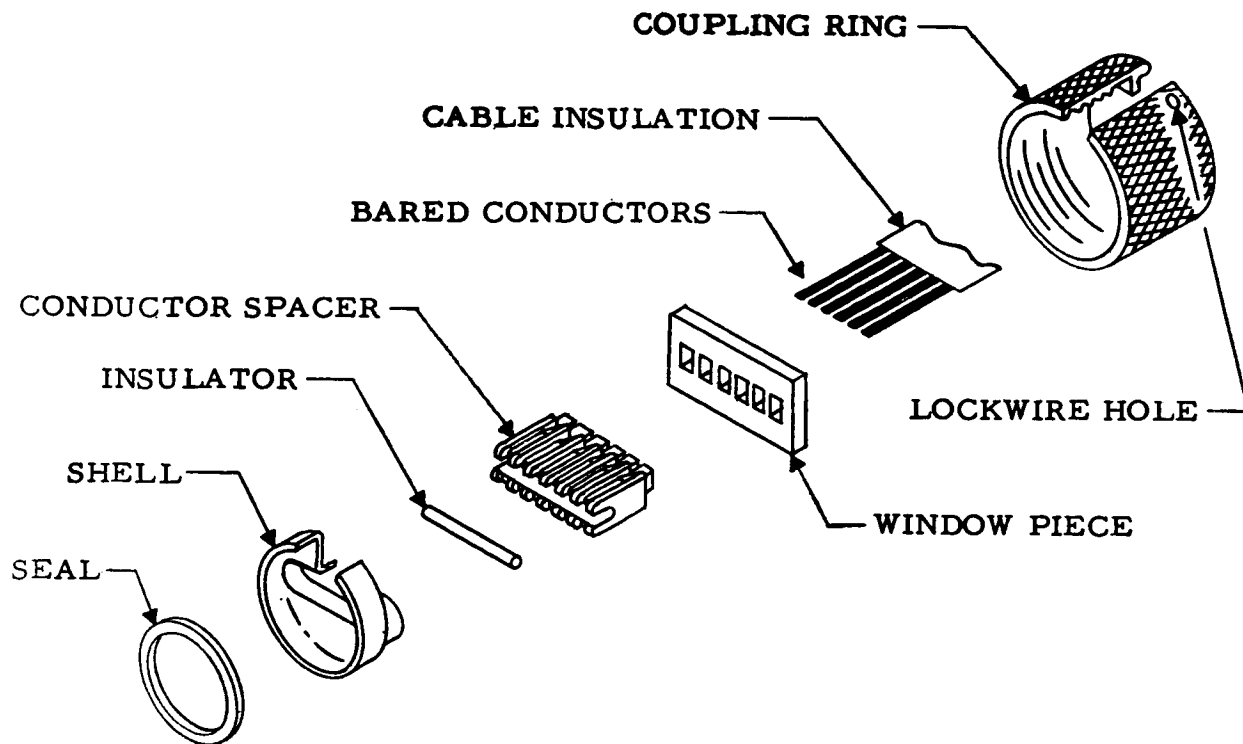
CYLINDRICAL PLUG PARTS
